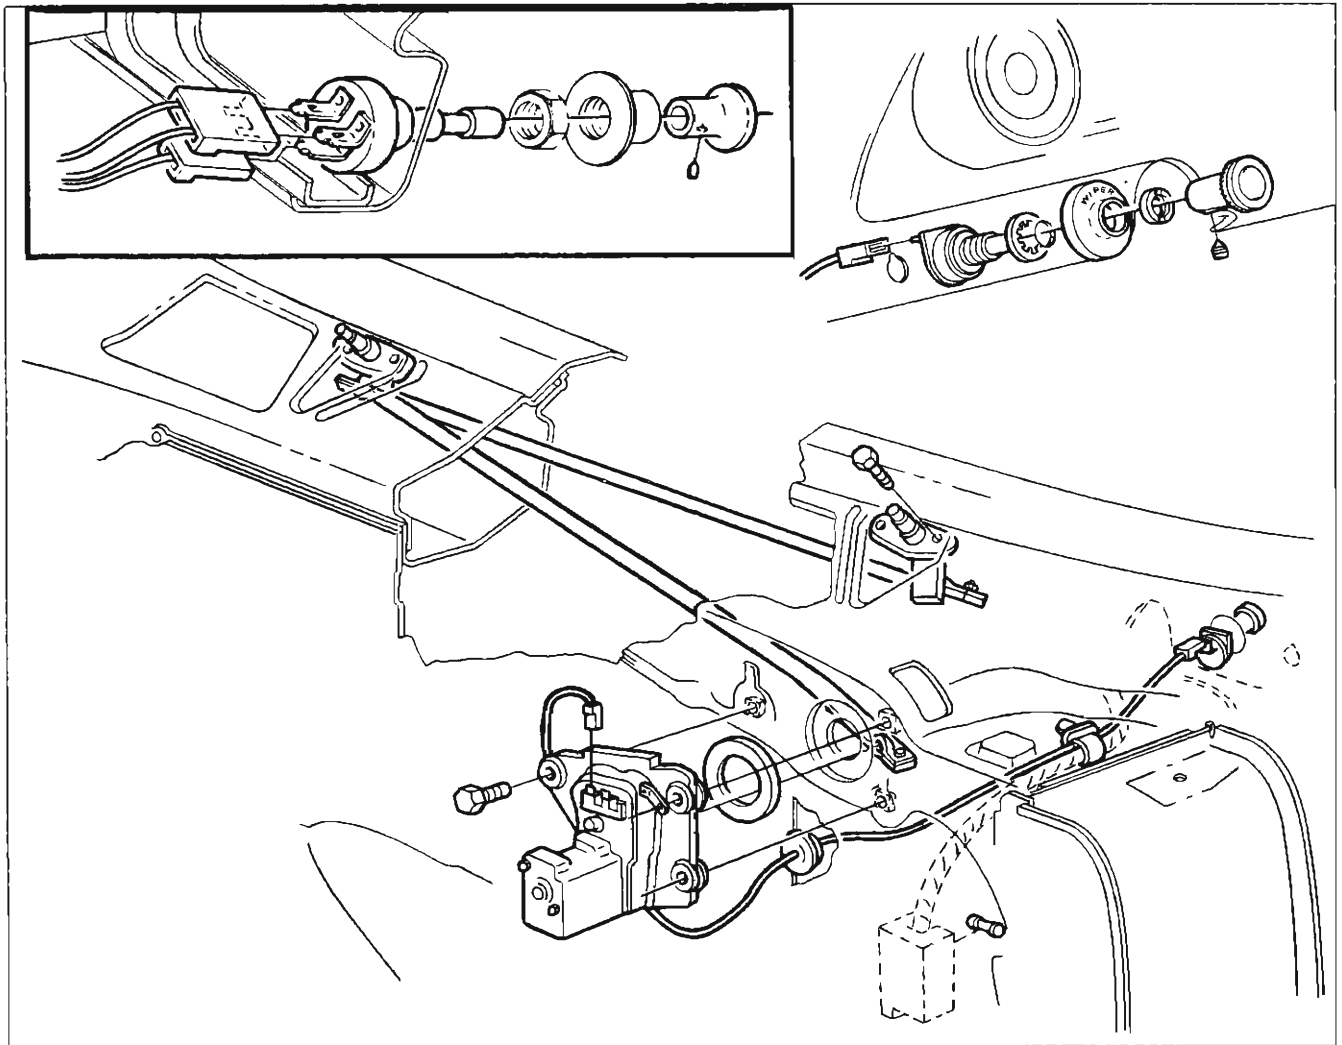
Windshield Wiper Motor and Linkage Assy. (Chevrolet)
